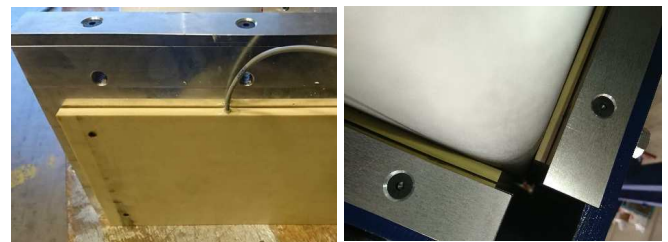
Bearing pad module assemblies. Left: Bearing pad with temperature sensor insert. Right: Bearing pad modules installed on translator support
